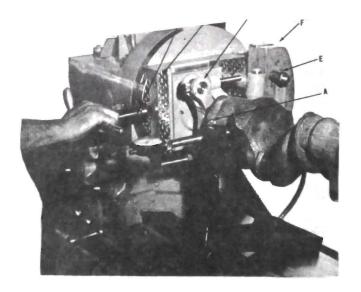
Adjusting Vertical Slide for Stroke Run-out
